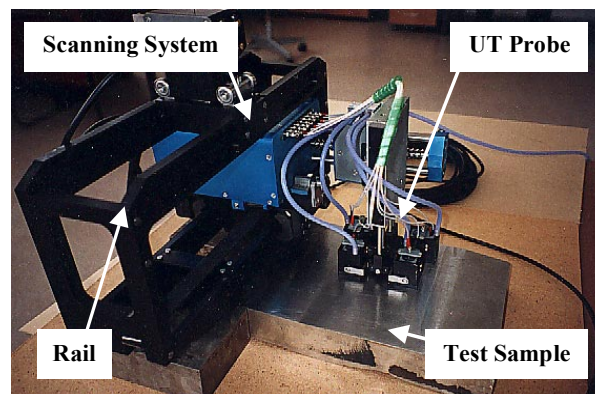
UT Inspection System for Straight Flat Inspection Region
